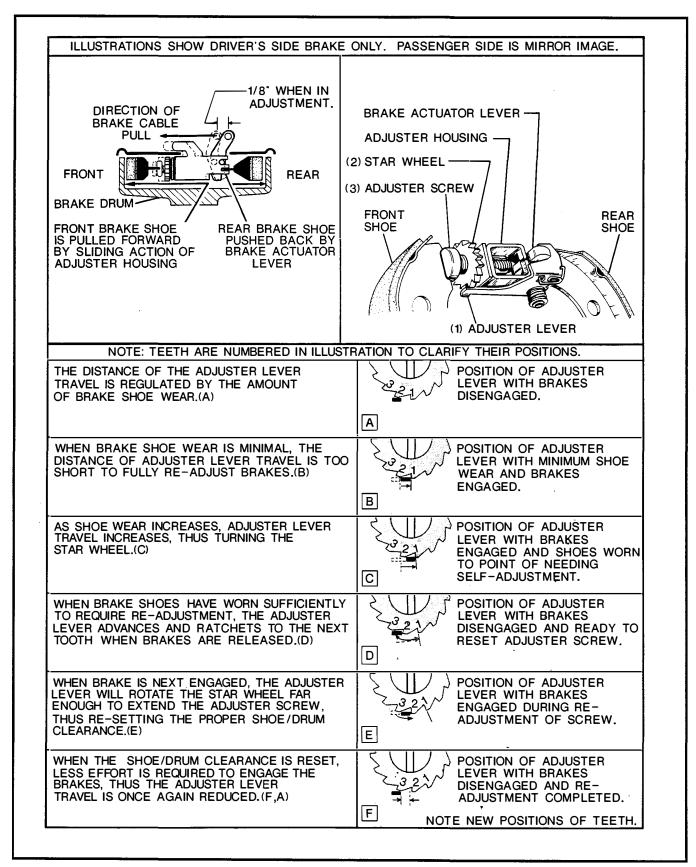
HOW THE BRAKE ADJUSTER WORKS
